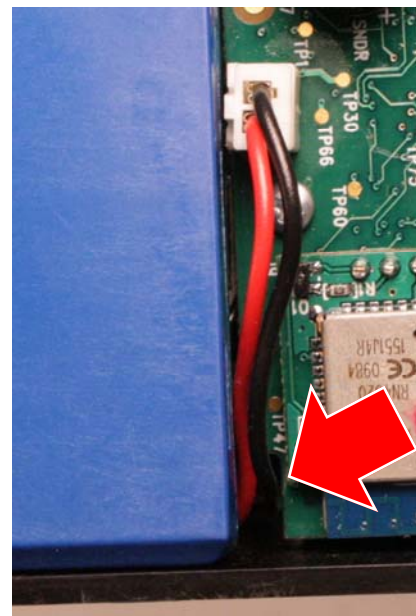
B: BE SURE WIRES ARE ROUTED THROUGH PCB OPENING (ARROW). Do NOT pinch wires!
